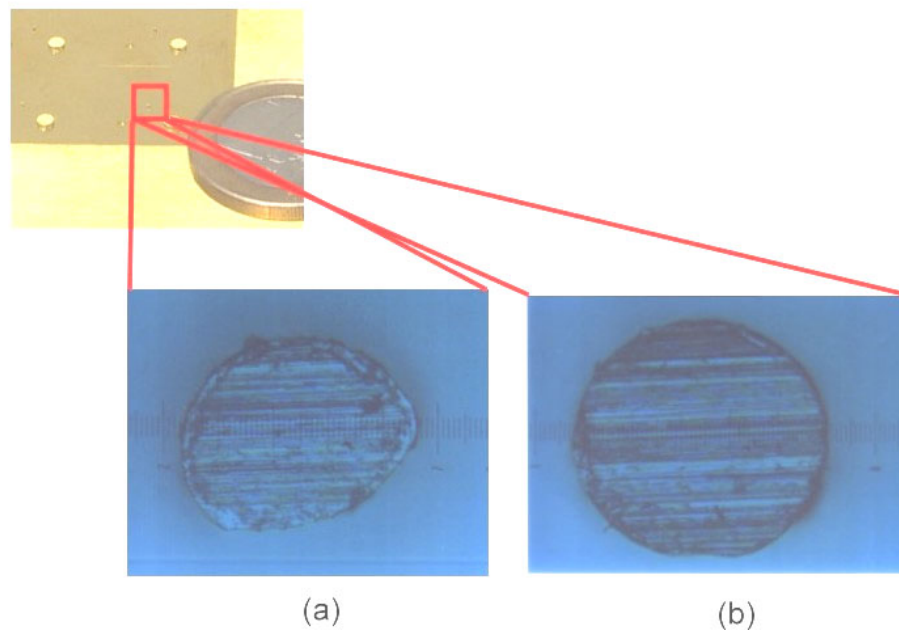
Pillars for the valve seat 2 with a diameter of 300 μm . Tool diameter compensations and path modifications (TDCAPM) were used to improve the contour accuracy of the pillars. (a) Before TDCAMP. (b) After TDCAMP.
